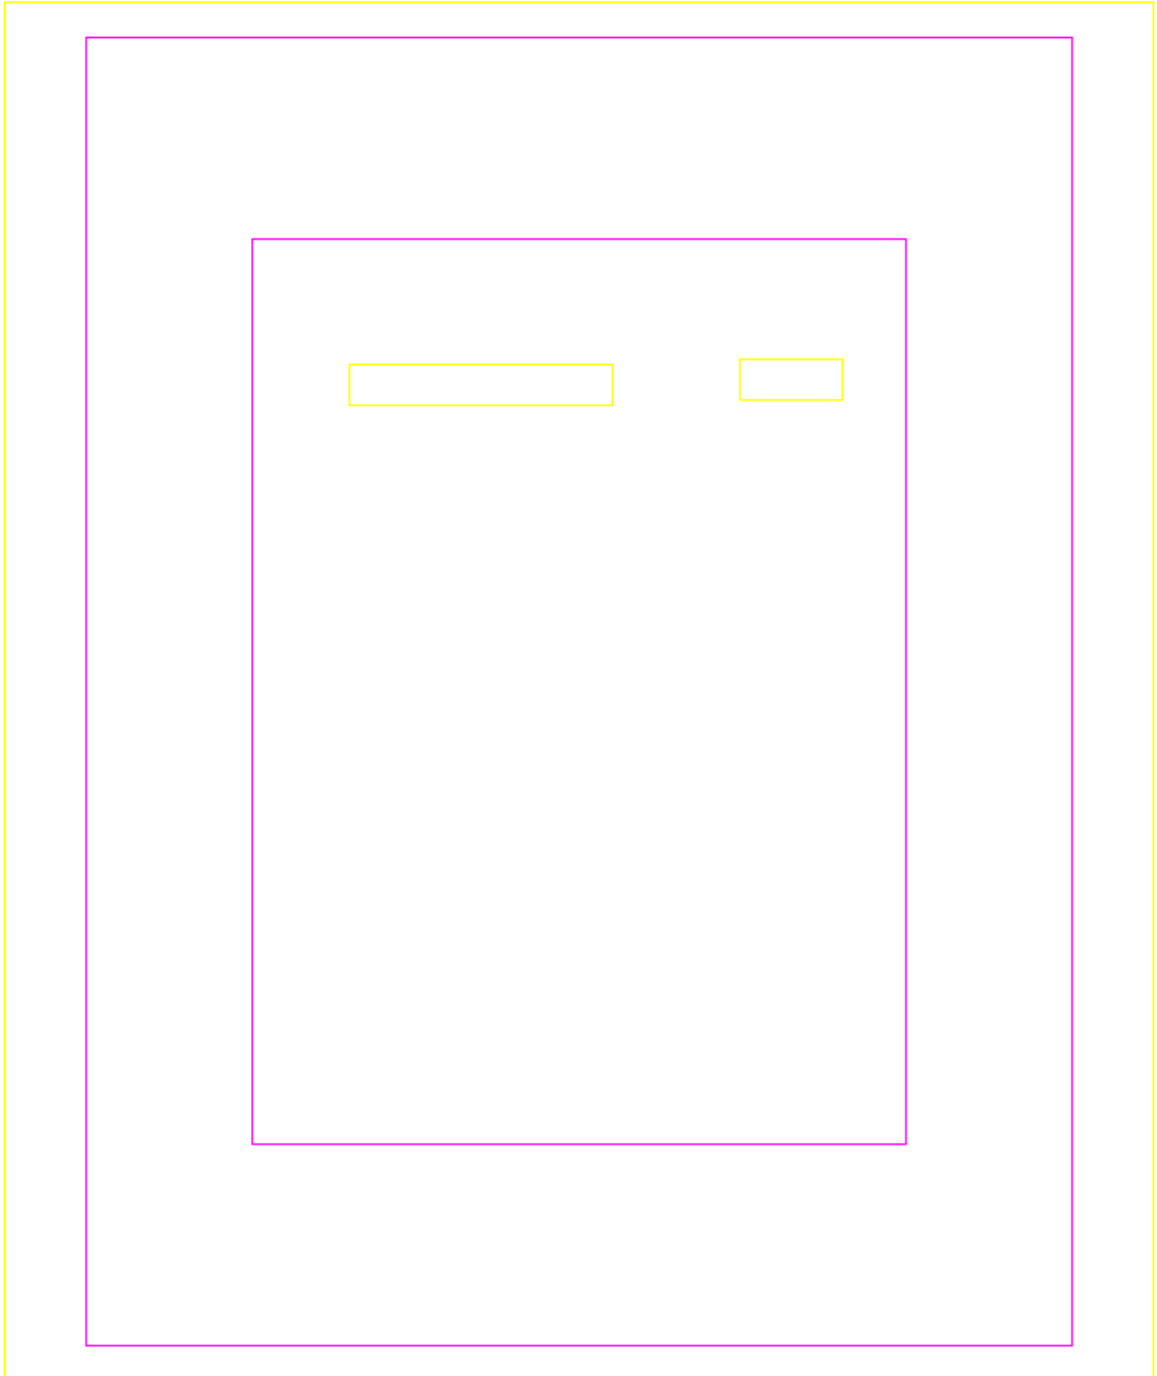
Layout of the Control Board Bottom Silk Screen
